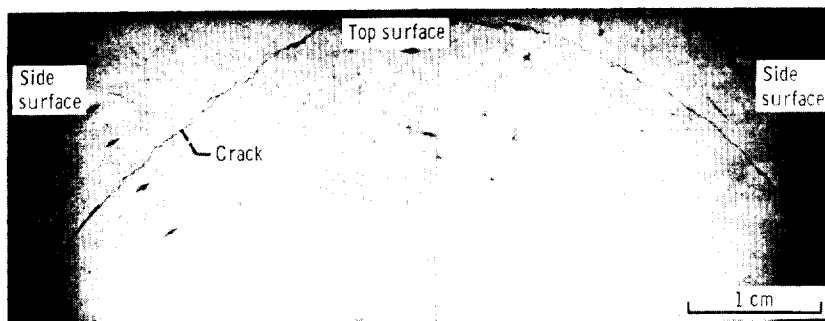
Cross section of unfailed gear tooth from failed modified Vasco X-2 gear showing crack at each corner of tooth.
